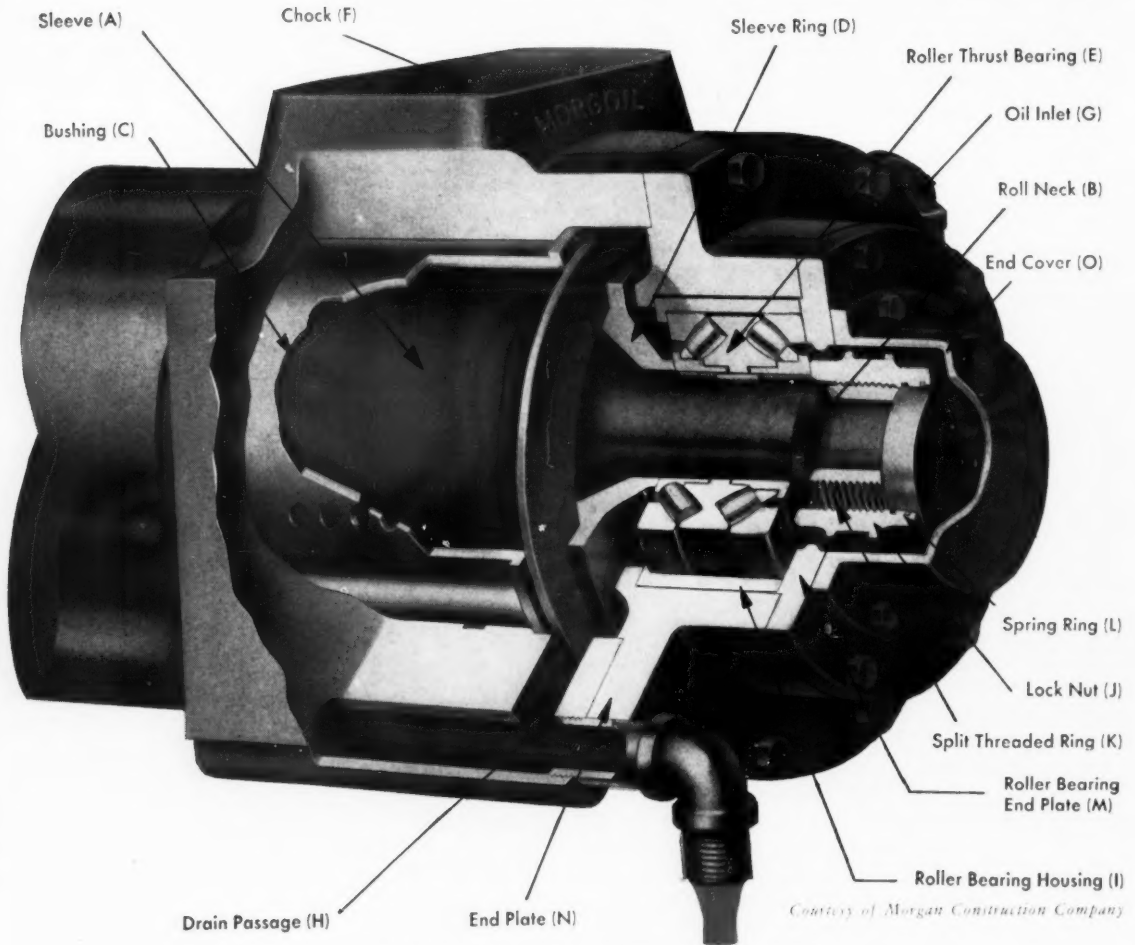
Structural details of the Morgoil bearing showing the roller thrust bearing. Red indicates certain features of the oiling system.
